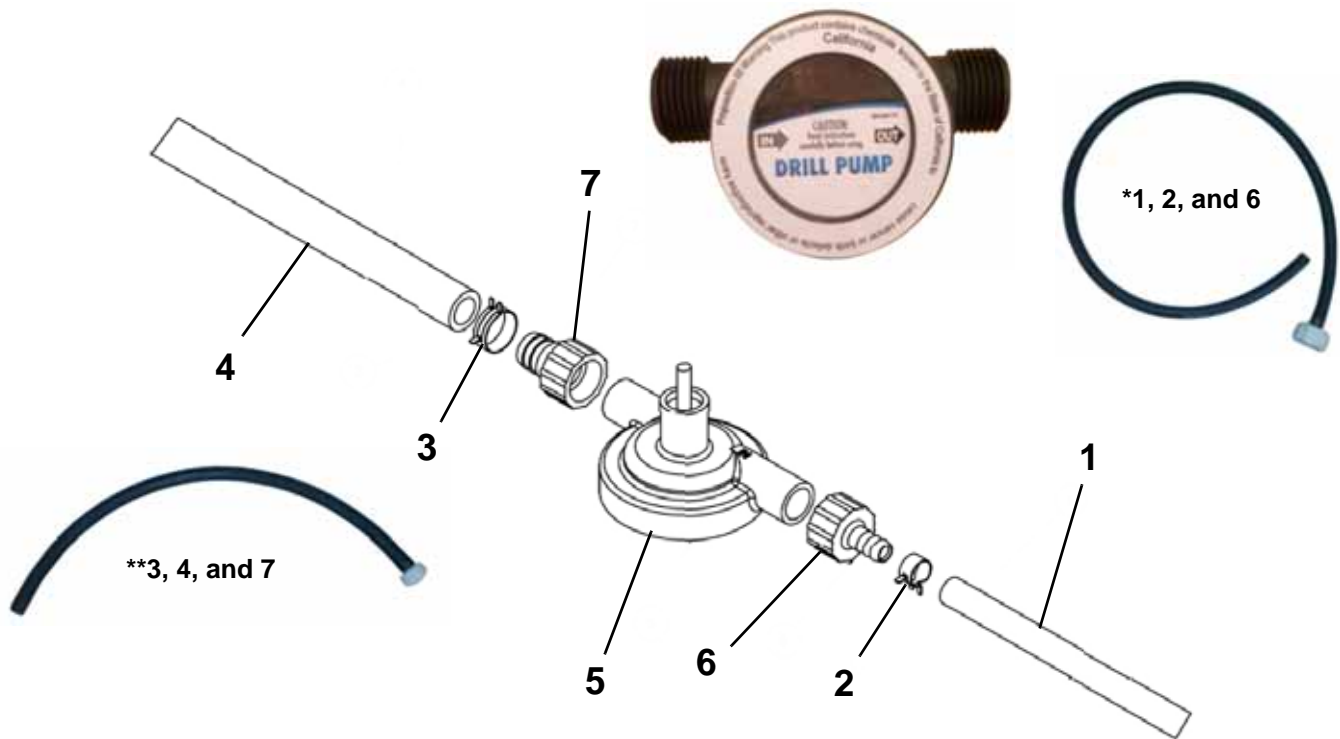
Exploded View – EcoGen Oil System Drain Pump Kit
